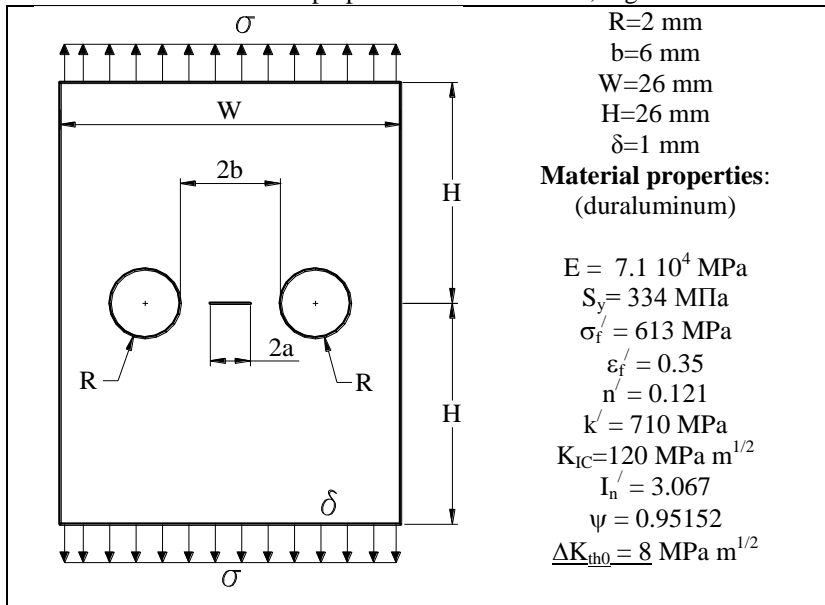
Geometric Properties of a Skin with a Crack between two Circular Holes
